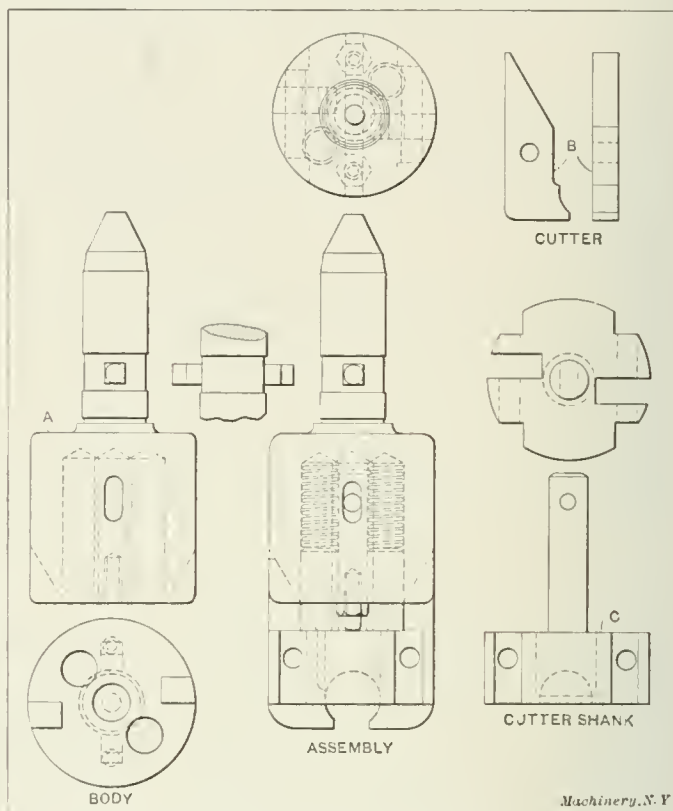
Details of Fixtures used on the Drill Press for Turning the Lower Part of Steering-spindle Balls
